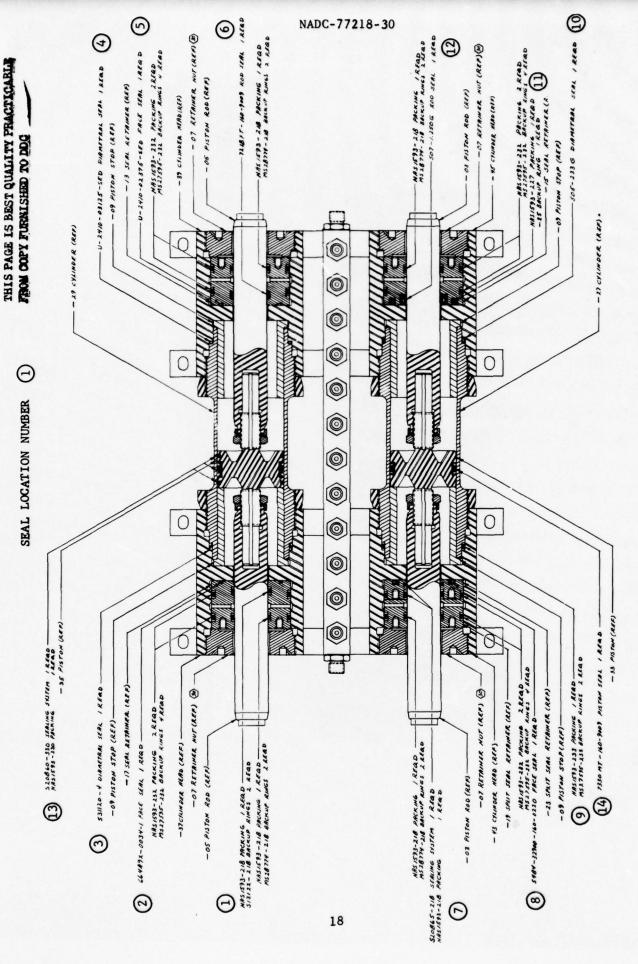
SEAL LOCATIONS IN TEST FIXTURE
